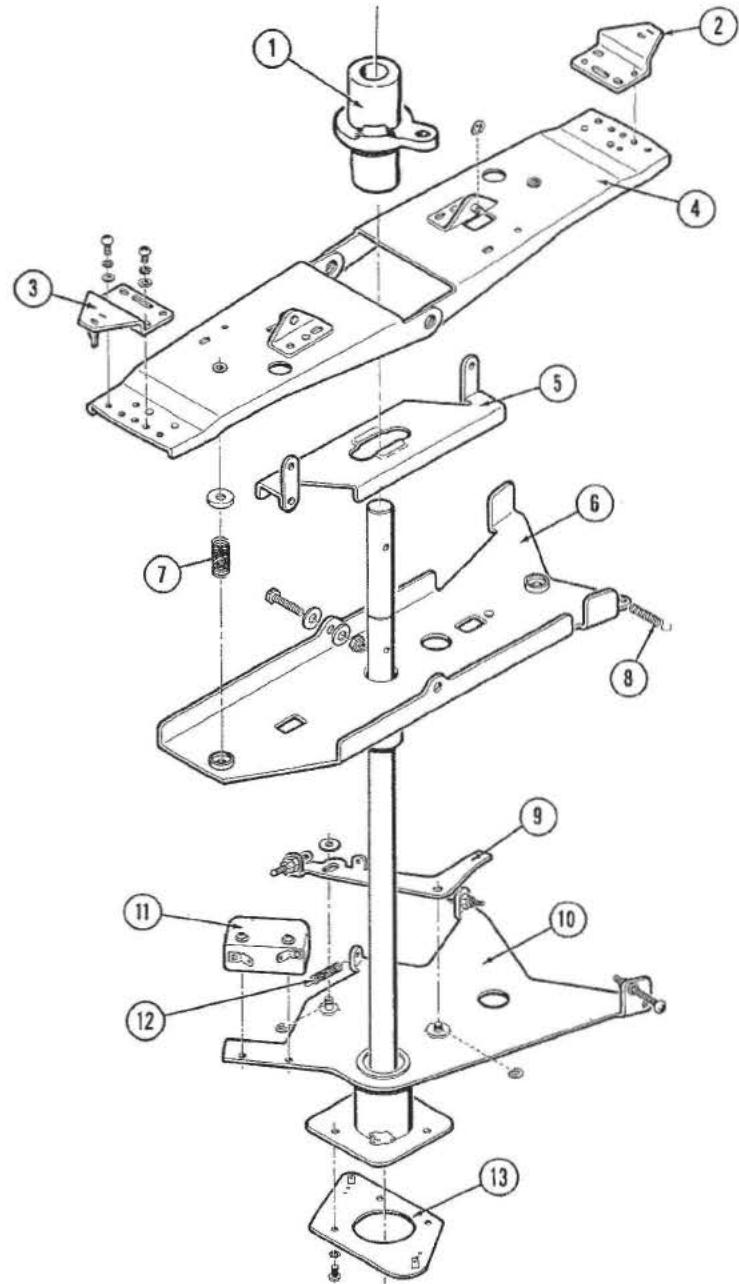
SELECTOR CRANK AND SHAFT ASSEMBLY
